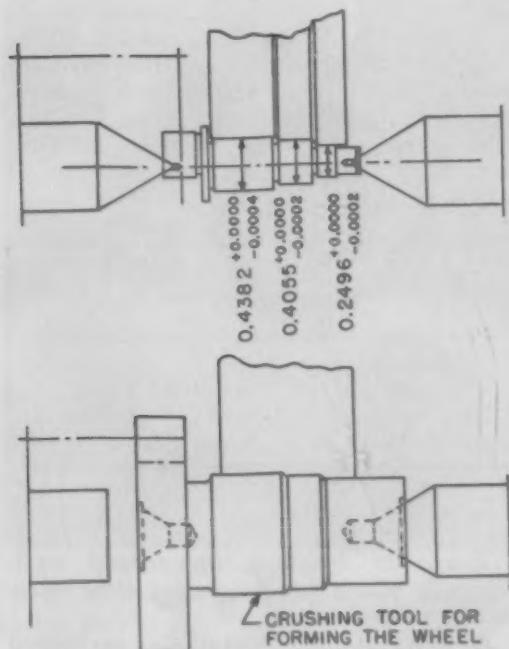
Sketch of the crushing tool (lower) for crush-forming the grinding wheel and, in the upper sketch, the part that is plunge-cut with the formed wheel. (Courtesy: Landis Tool Co.)
